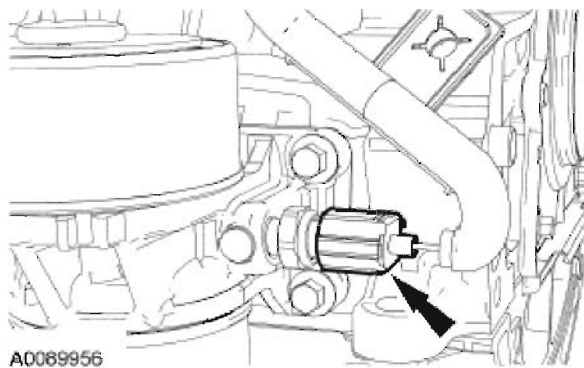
Locating Bolts & Thermostat Housing Assembly
